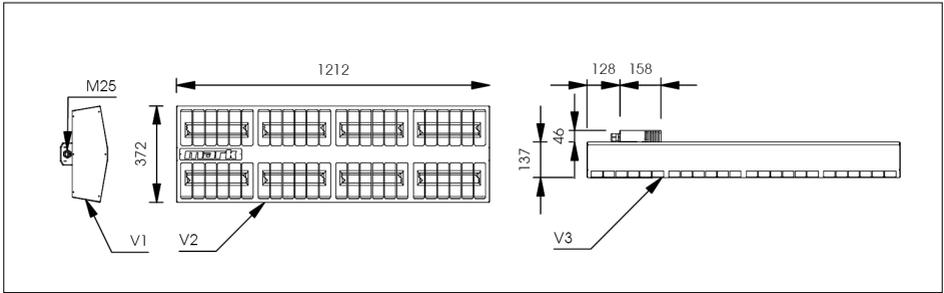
Dimensions of the INFRA ER 6400. (V1: Left side view, V2: Bottom view, V3: Front view)
